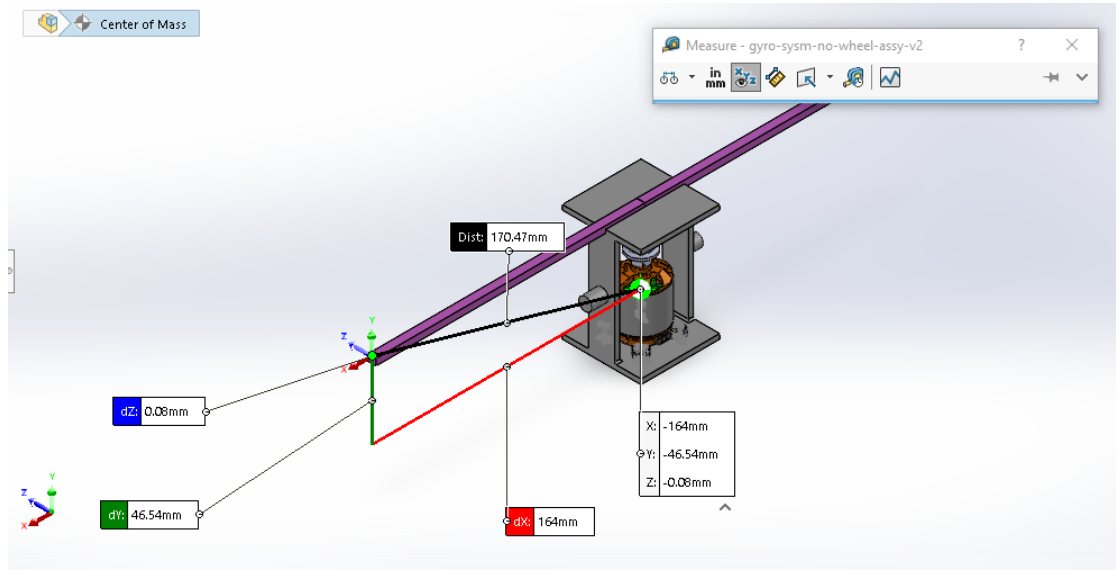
The location of *sensor2*/the cage landmark in the assembly. Showing the measurement from the landmark to the COM.
